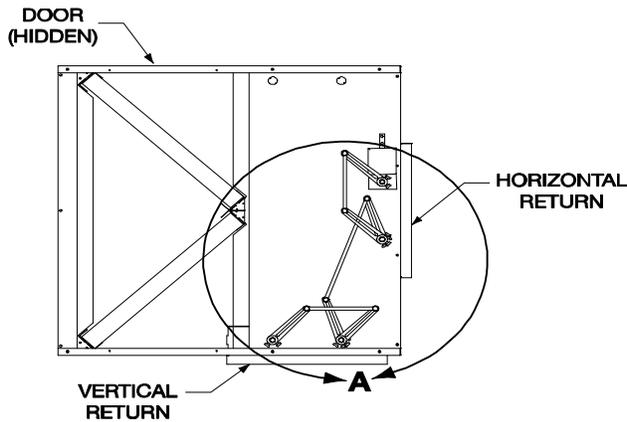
Linkage Assembly Front View (Sizes 16-80)
